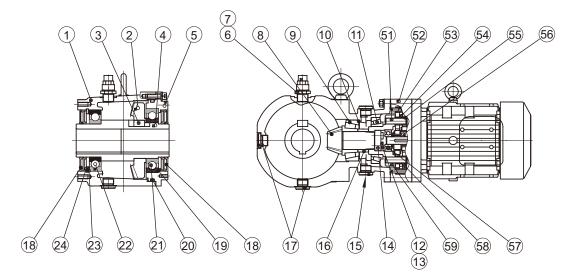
Type LHYM (Gearmotor), (Example: Frame size 5Z115-Y1)
